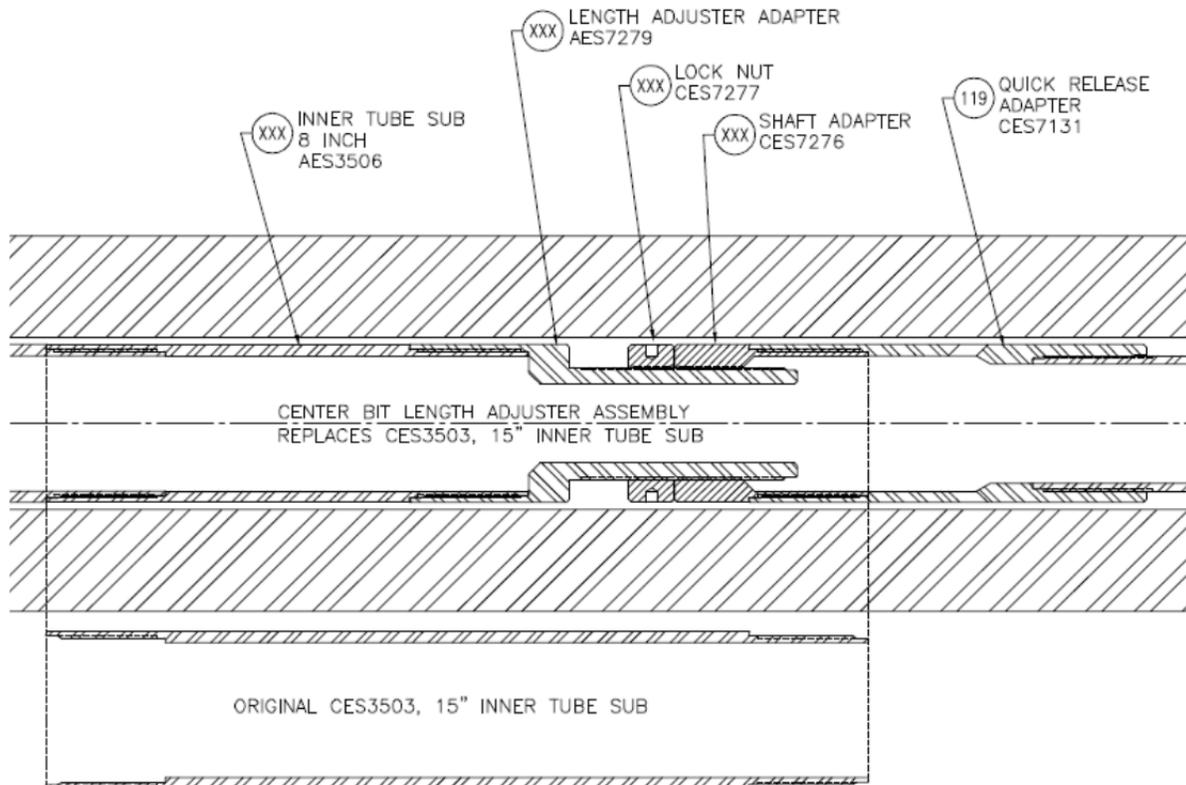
Center bit length adjuster replaces the 15” Inner Tube Sub.
